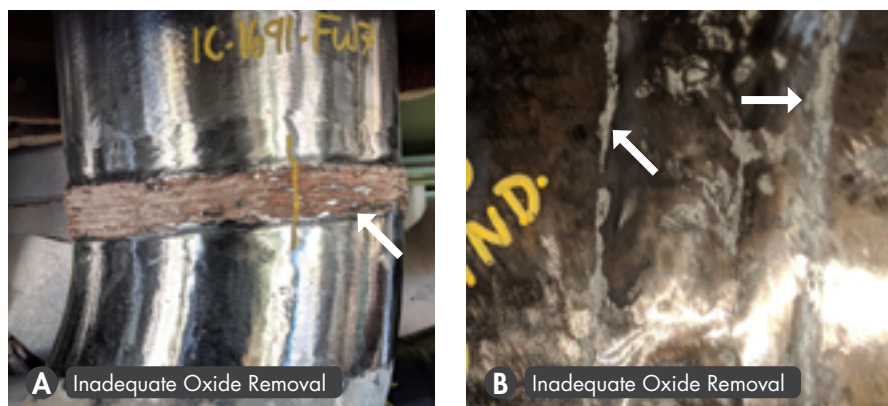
Examples of Inadequate Surface Prep at (A) Multiple Weld Passes and (B) Weld Toes
